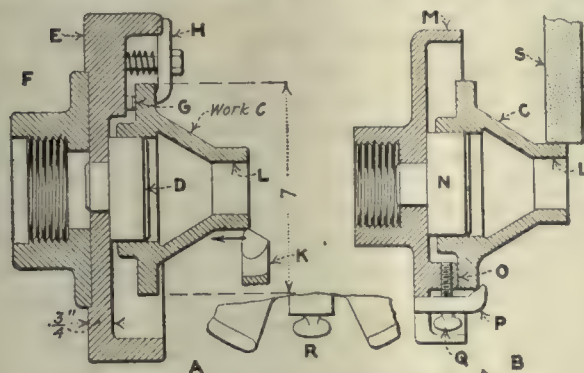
TURNING AND GRINDING FIXTURES FOR A FLANGE
